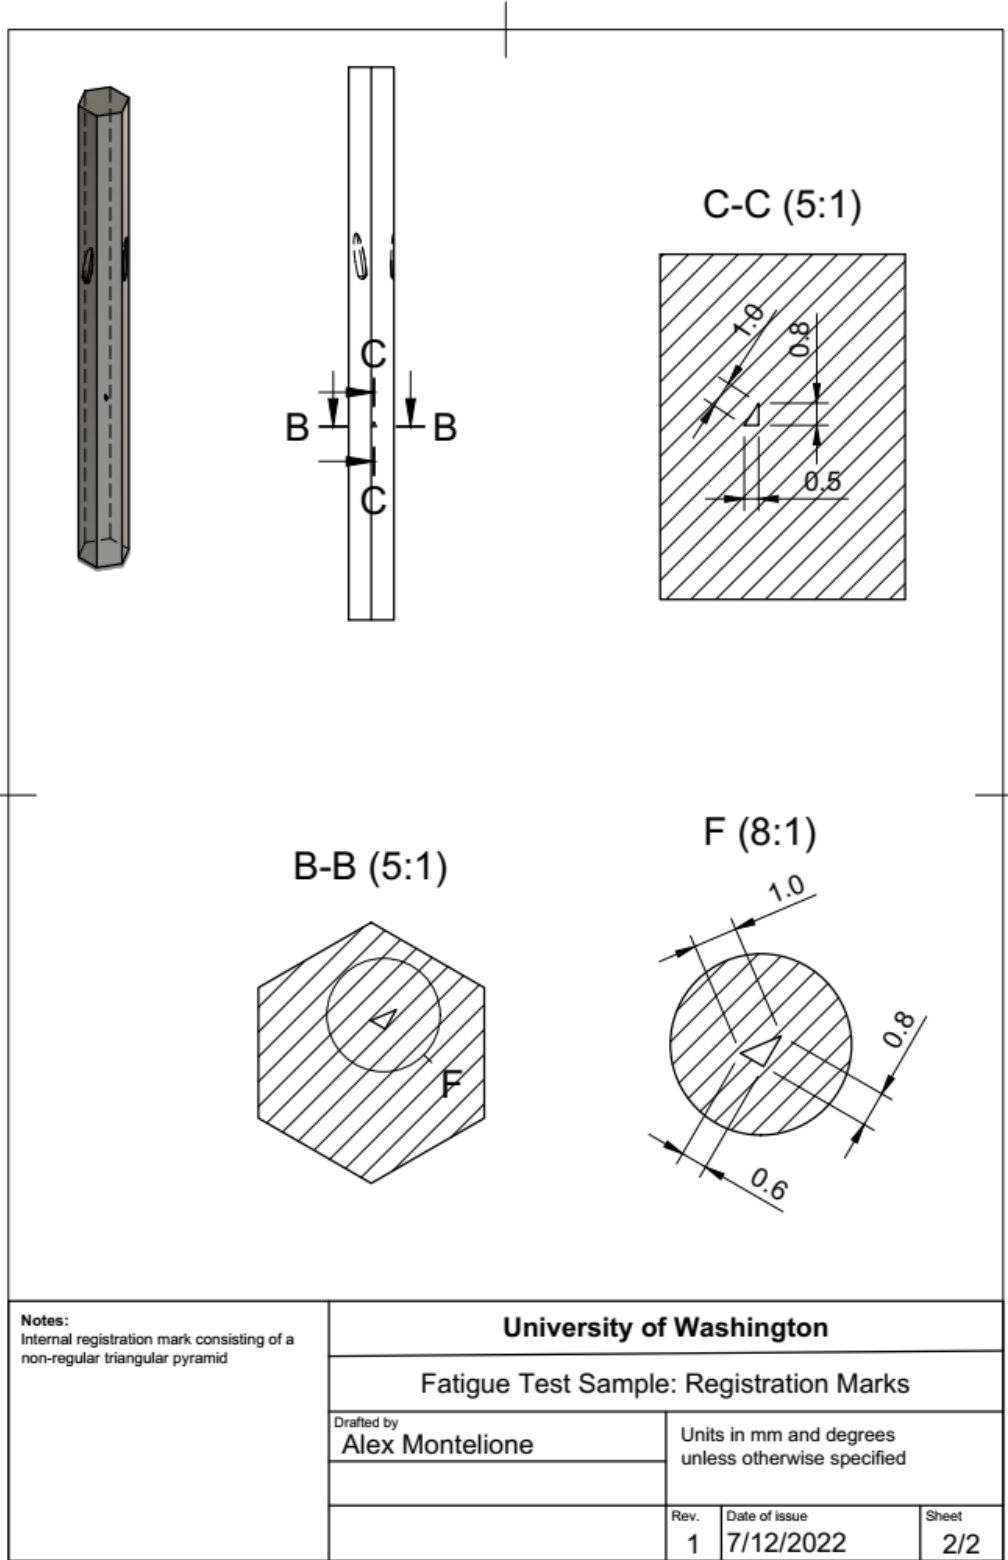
Drawing showing dimensions and positioning of the internal registration marks
